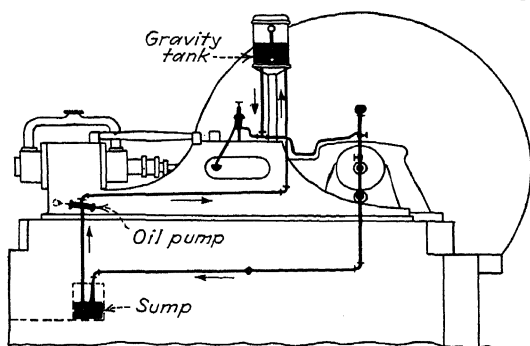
Carbon dioxide compressor with gravity circulation to bearings and mechanical-force feed to bearings and packing gland. (Courtesy Socony-Vacuum Oil Co.)
